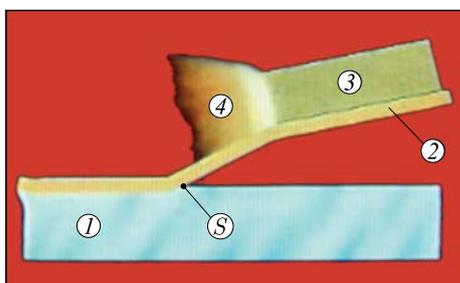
Principal scheme of explosion welding process with an angle between metal sheets: 1 — base plate; 2 — cladding plate; 3 — explosive; 4 — detonation products; S — point (line) of contact of surfaces during welding
